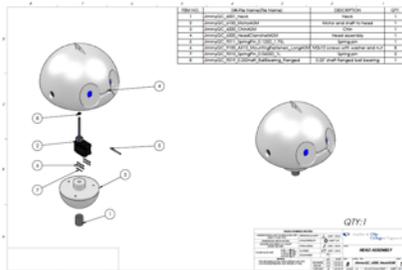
Mechanical drawing and parts list for JimmyQC’s simple but still expressive head
